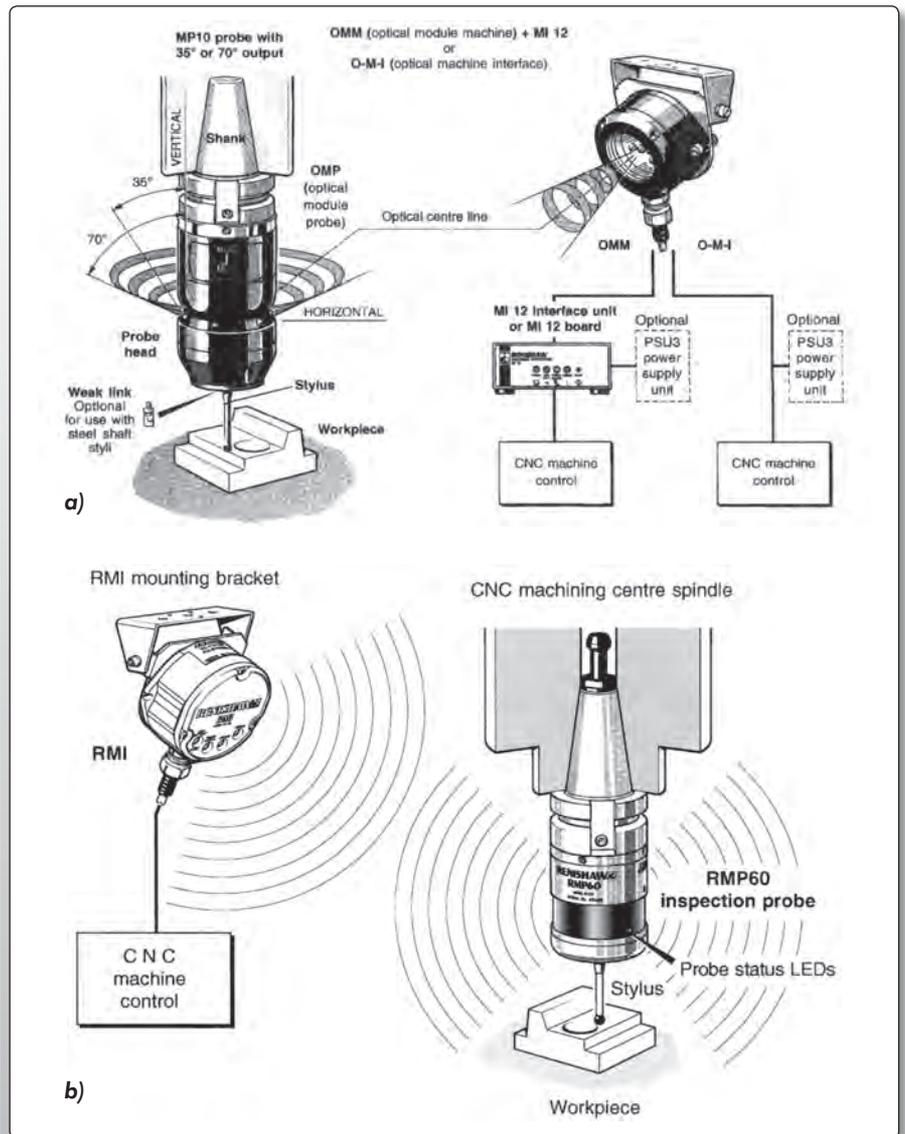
Workpiece measuring probes – a) optical transfer, b) radio transfer [Renishaw]
